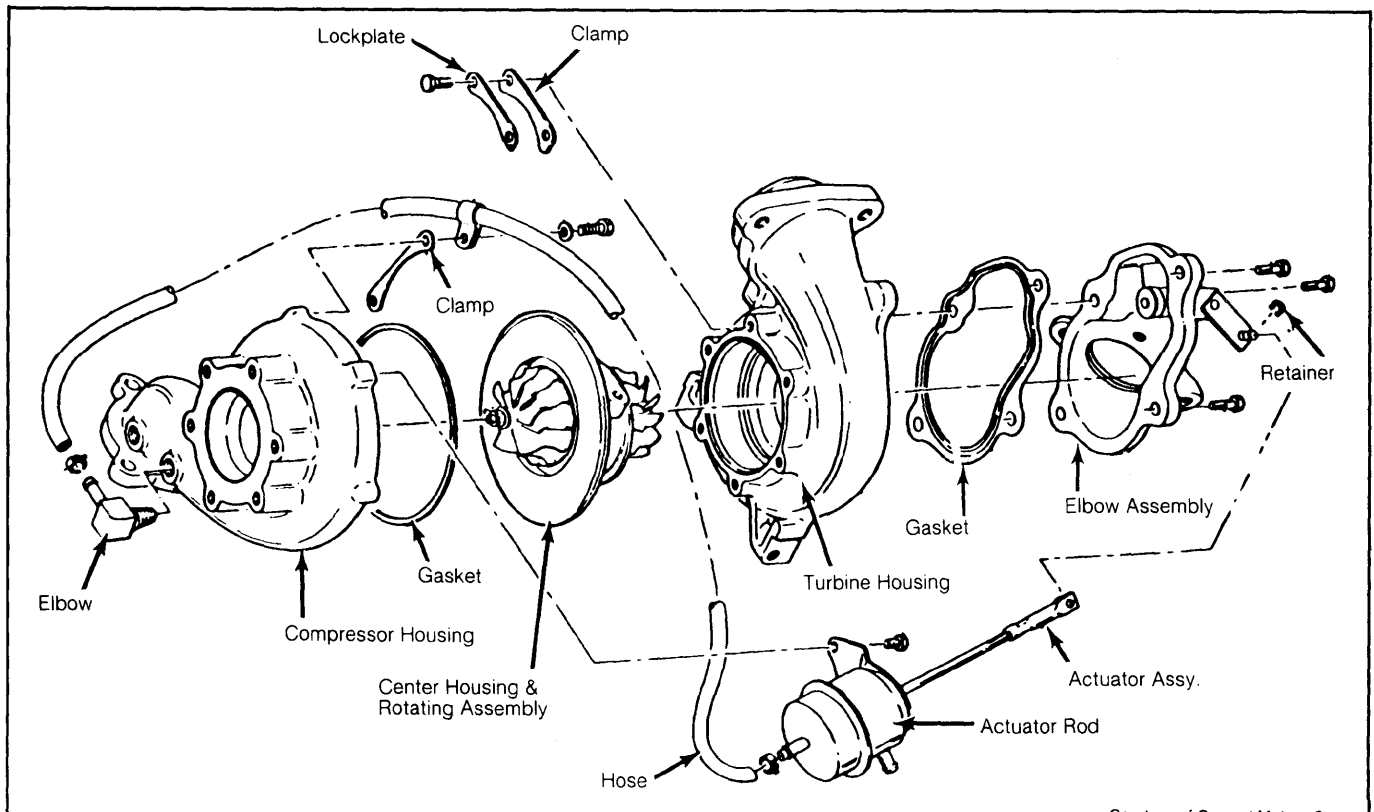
Exploded View of General Motors V6 Turbocharging System
